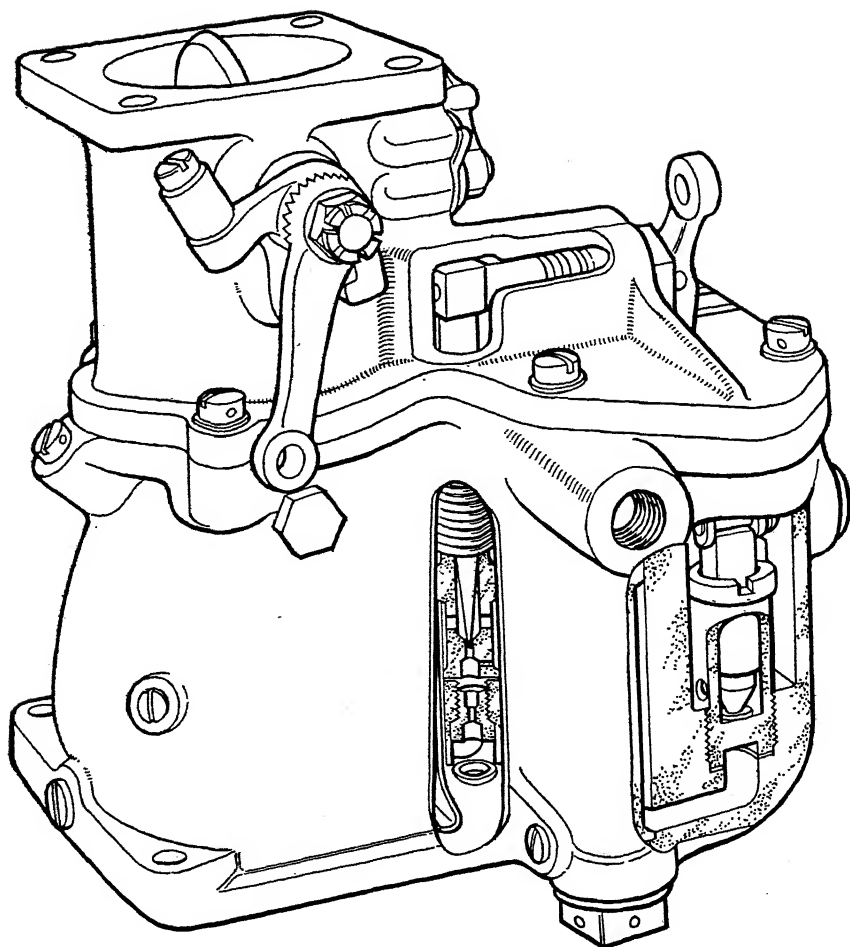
MIXTURE CONTROL AND FLOAT NEEDLE VALVE ASSEMBLY
